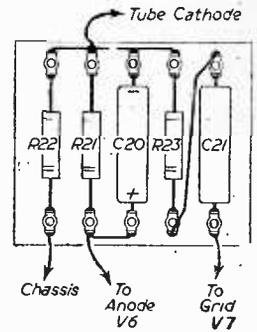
Tagboard fitted to tube rear support, showing component wiring.
